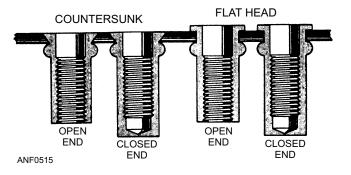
Sectional view of rivnut showing head and end designs.
